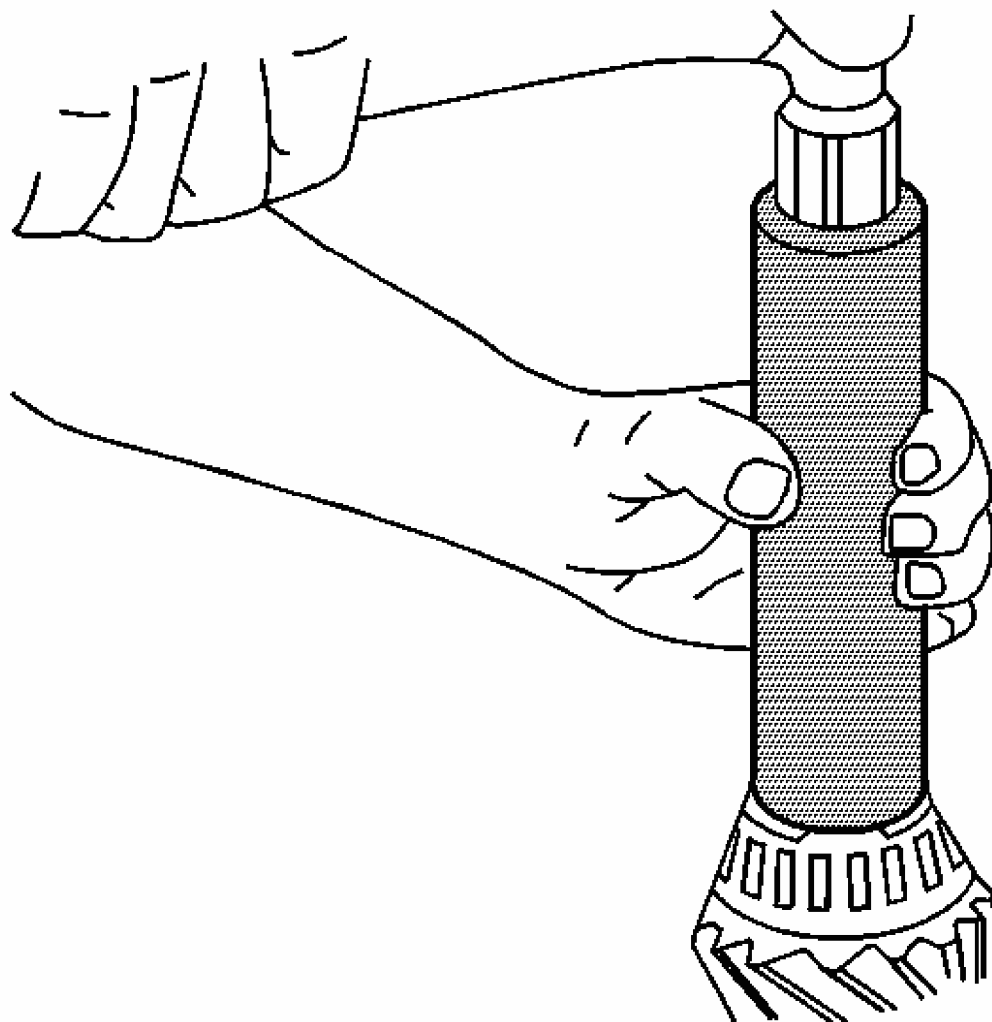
Installing Inner Pinion Bearing Onto Pinion Gear
